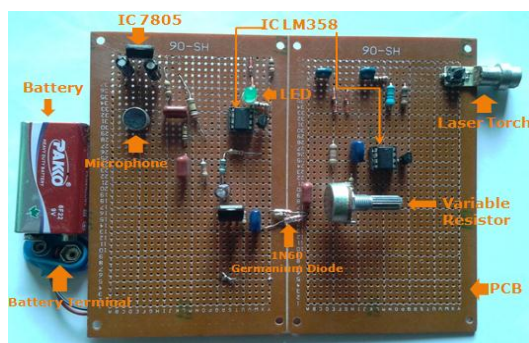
Laser torch based voice transmitter circuit of our project on PCB board.
